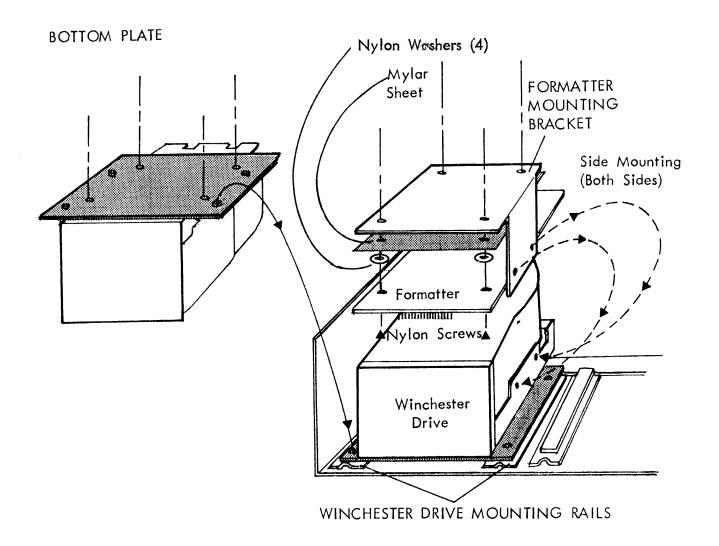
WINCHESTER DRIVE/FORMATTER INSTALLATION
